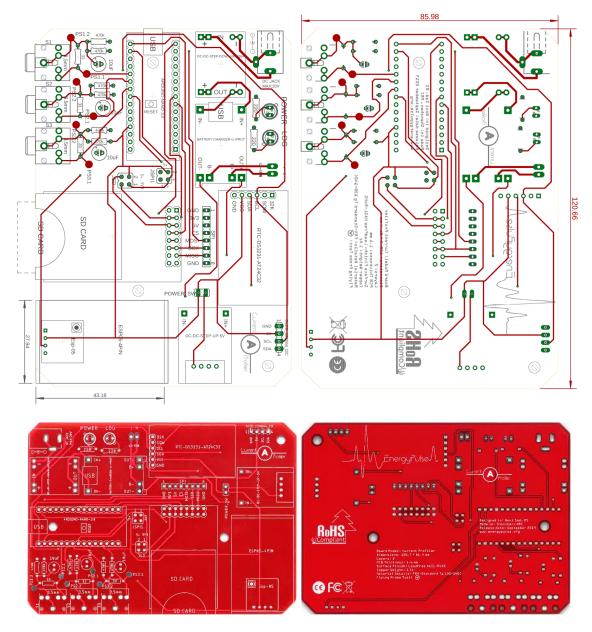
Current Profiler PCB model (Up) and produced PCB (Down)
